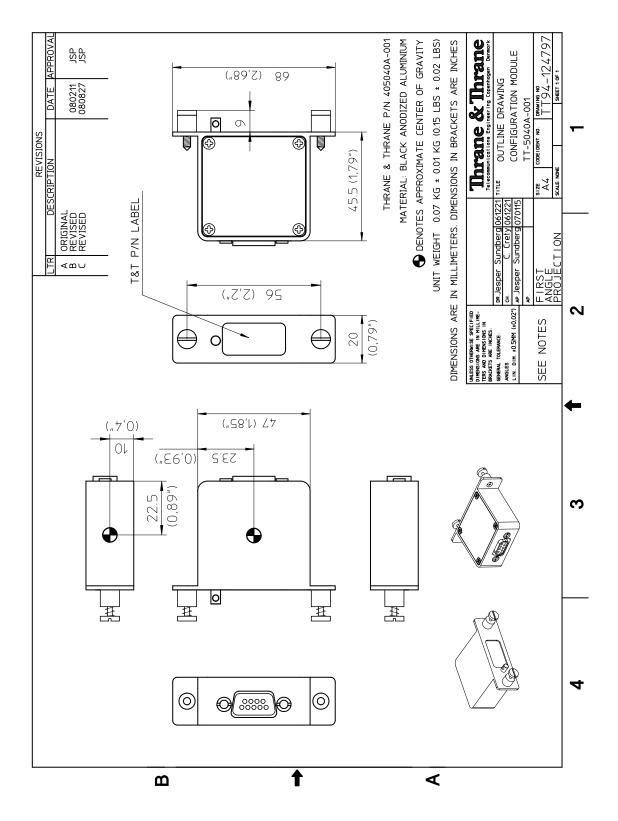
Outline drawing: TT-5040A-001 CM, inserted in the SBU
